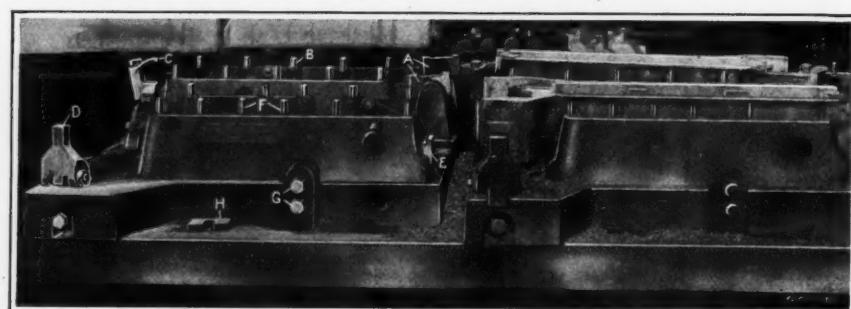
Close View of Fixtures in which Work is held for First Operation
